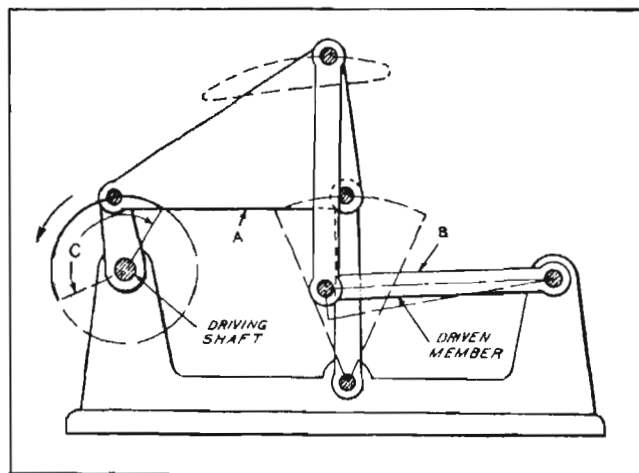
Mechanism that Allows the Driven Member B to Remain in Position Shown while Crankpin of Driving Arm Passes through Arc C
